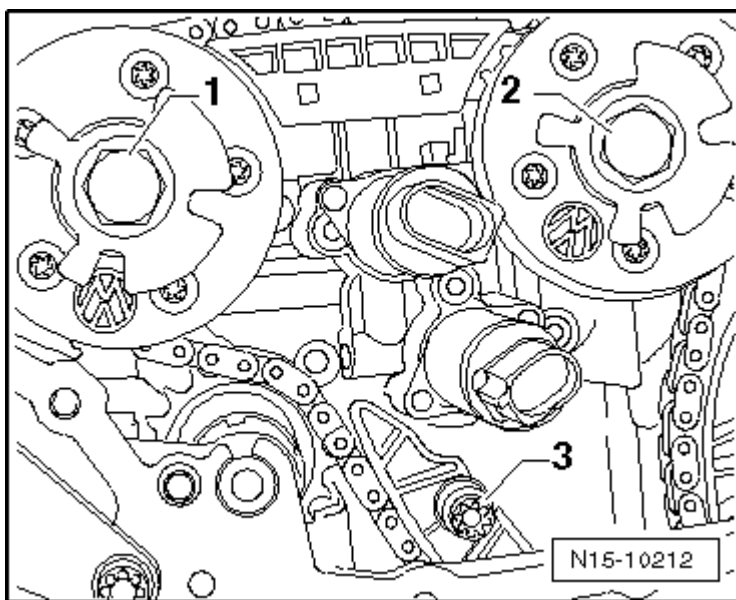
Camshaft Adjuster Mounting Bolts And Bolts Of Glide Track
